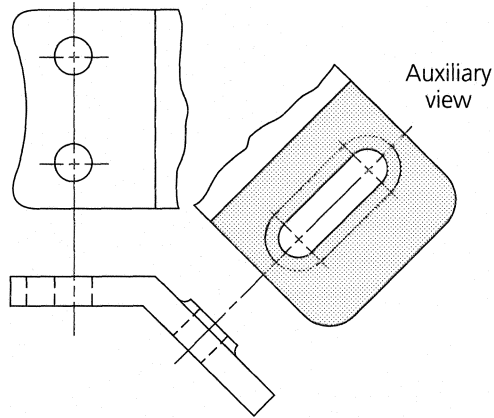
Full Front View, Partial Top View, and Partial Auxiliary View of a Simple Part
